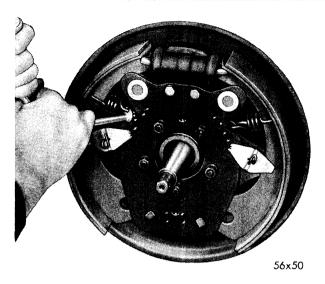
Removing Rear Brake Shoe Return Spring with Tool C-3462
